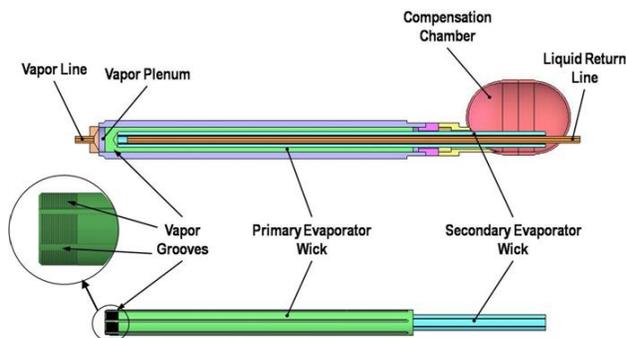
Detailed view of LHP evaporator/compensation chamber assembly
